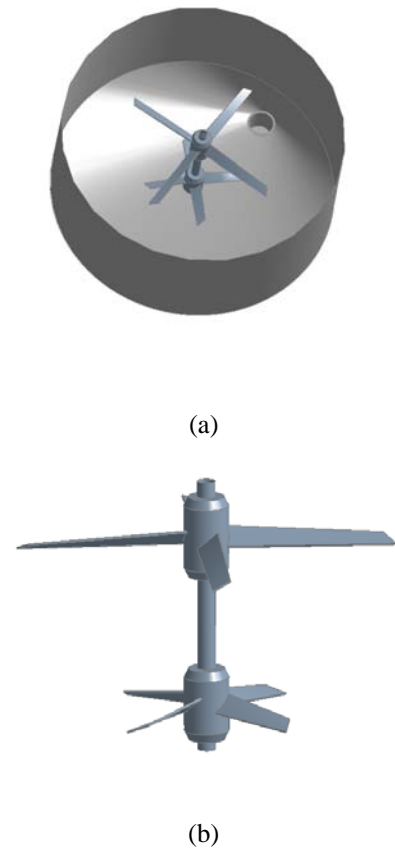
Perspective view of the mixer model (a) and pitch blade turbine type impeller (b).
